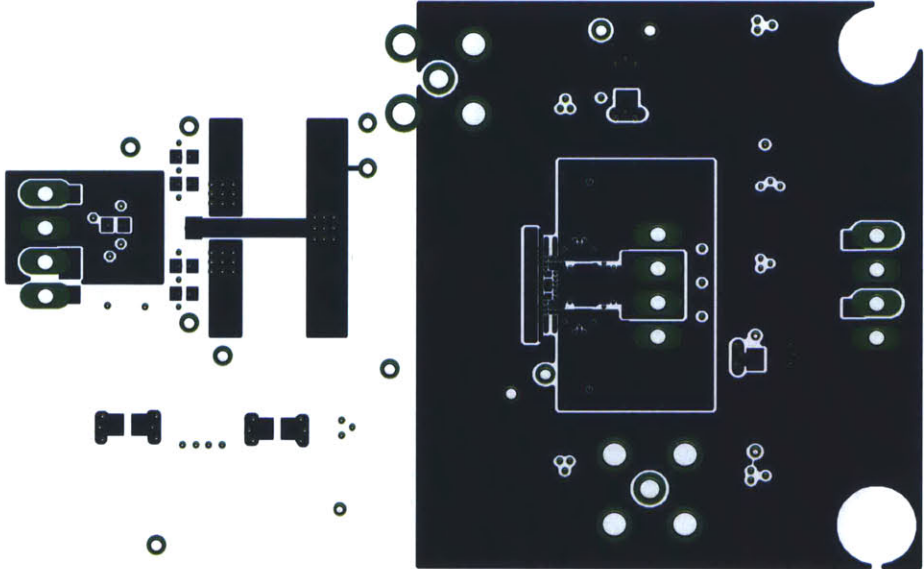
The Layer 4 PCB Layout of the Non-isolated GaN-Si Dc-dc Converter Prototype.
